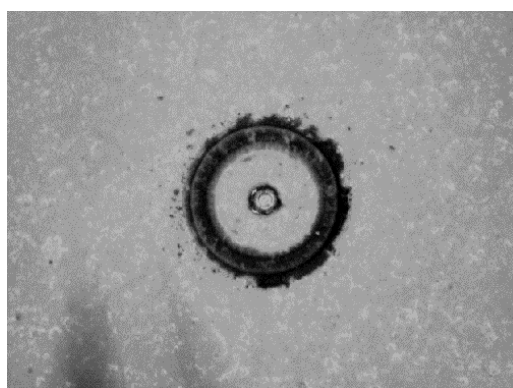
Optical image of defect operated in the coil-coated steel specimen with a drill.
